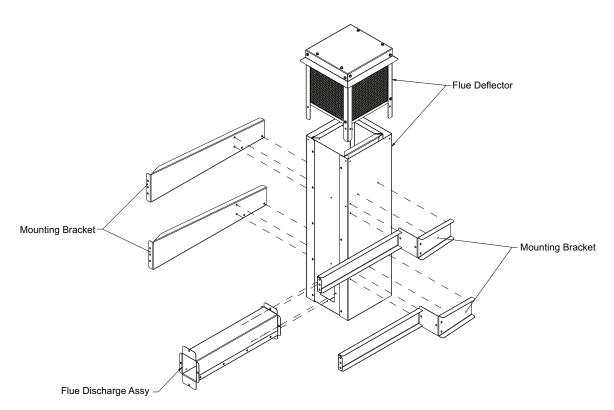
Flue Discharge Deflector Assembly (Low Heat)
